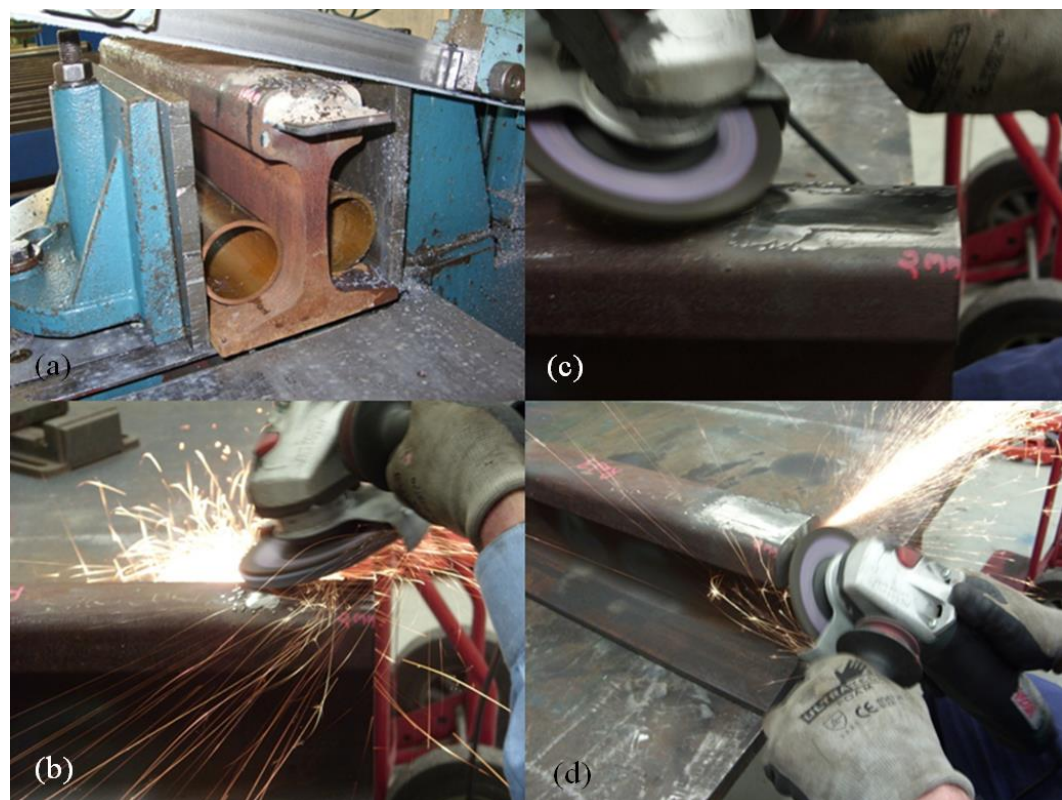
(a) Hacksaw cut for extra weld run at the rail end (b, c & d) grinding and polishing the rail surface and rail end
